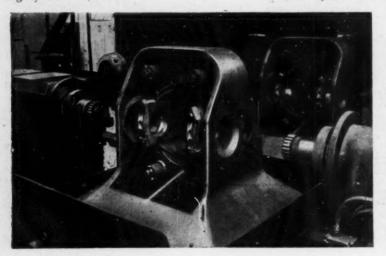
After the differential bearing cap bores have been roughed and semi-finished, the outer ends are threaded by planetary type milling heads at each side of the machine at station No.18
